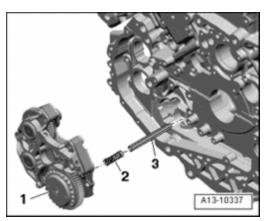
Removing Bolts & Spur Gear Unit Courtesy of VOLKSWAGEN UNITED STATES, INC.
